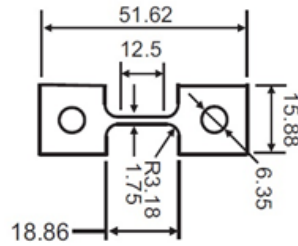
Tensile specimen geometry developed by Smerd et al.[5]. All dimensions are in mm.
